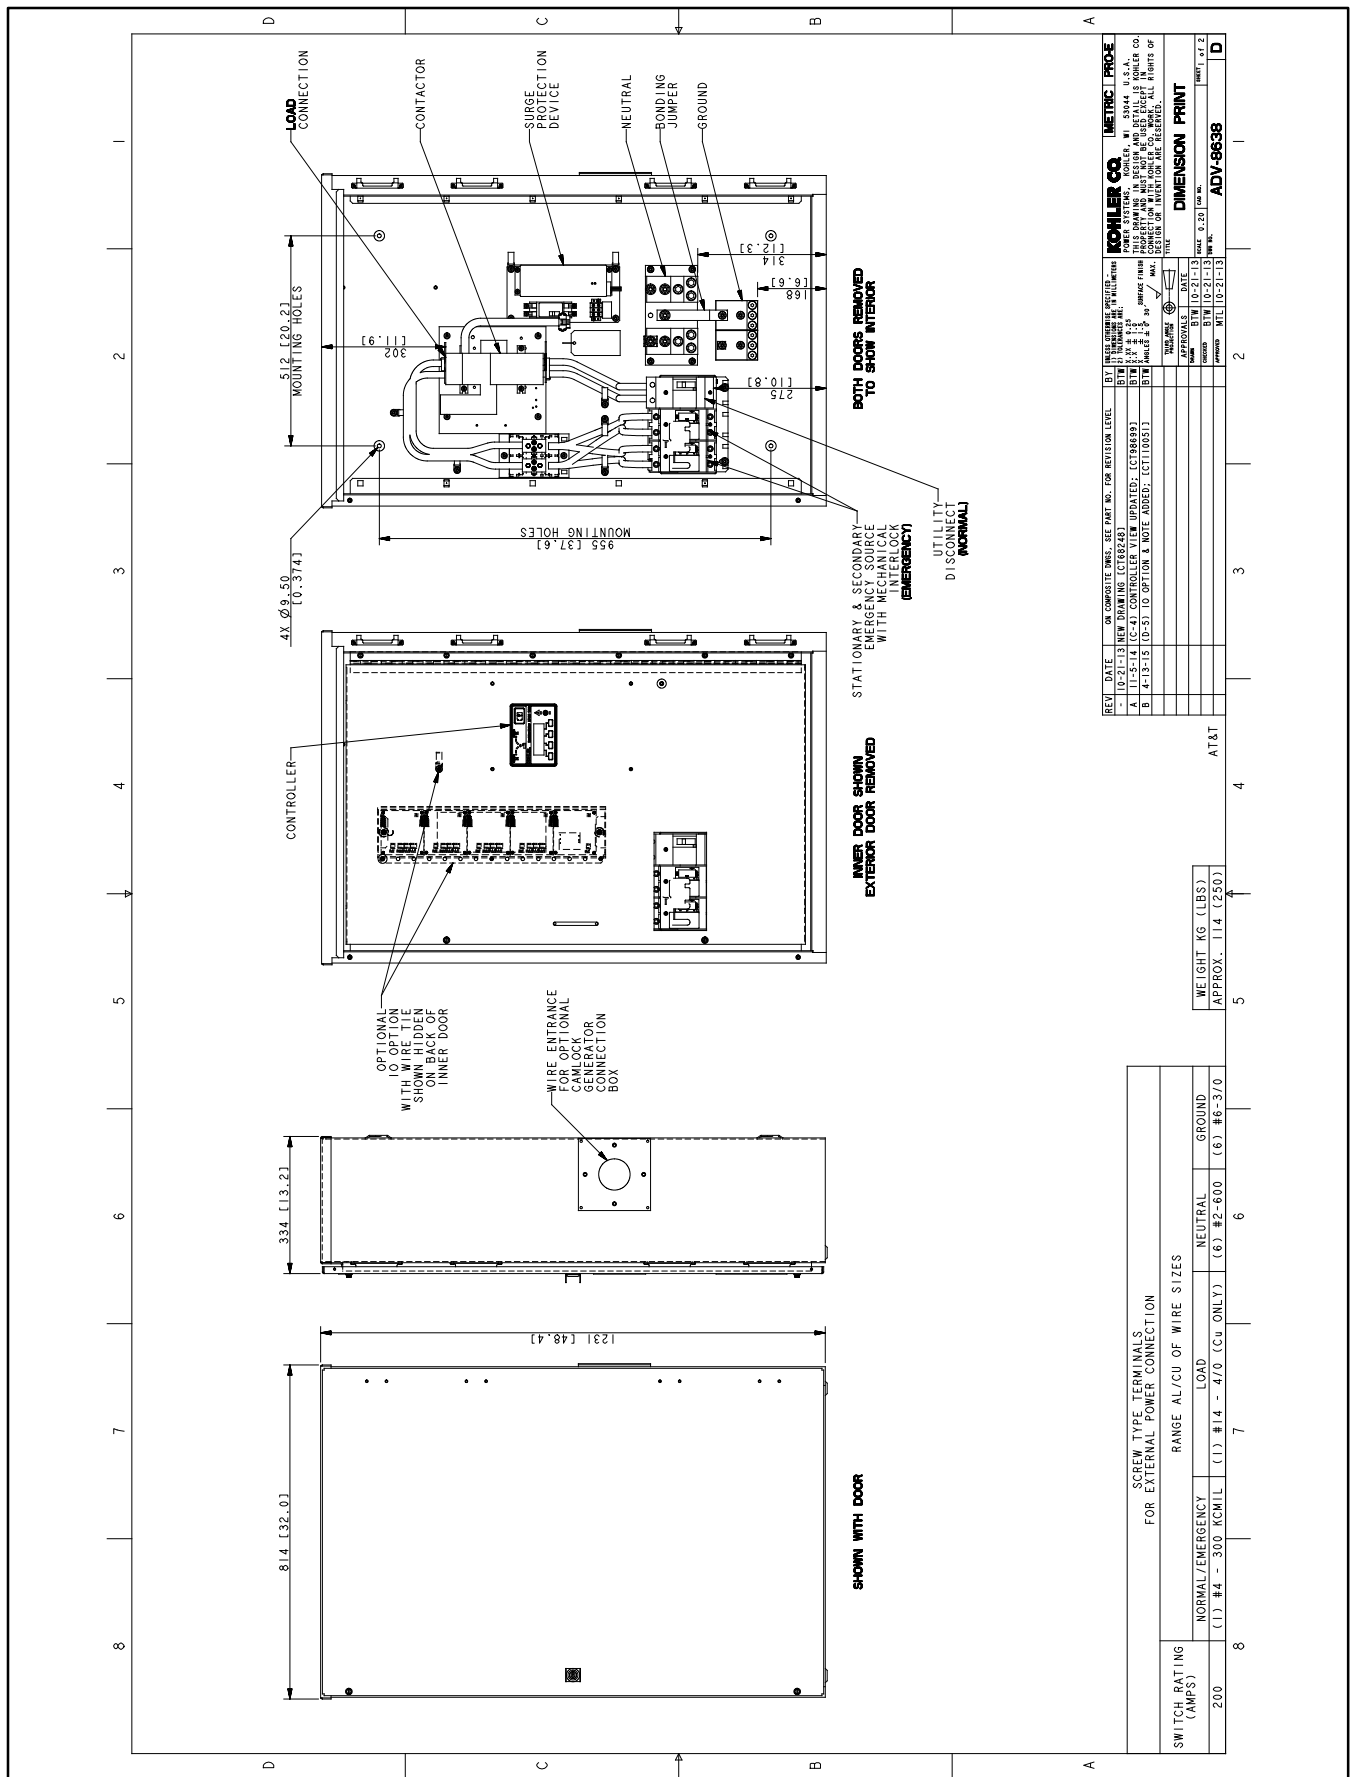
Transfer Switch Dimension Drawing, ADV-8638, Sheet 1
